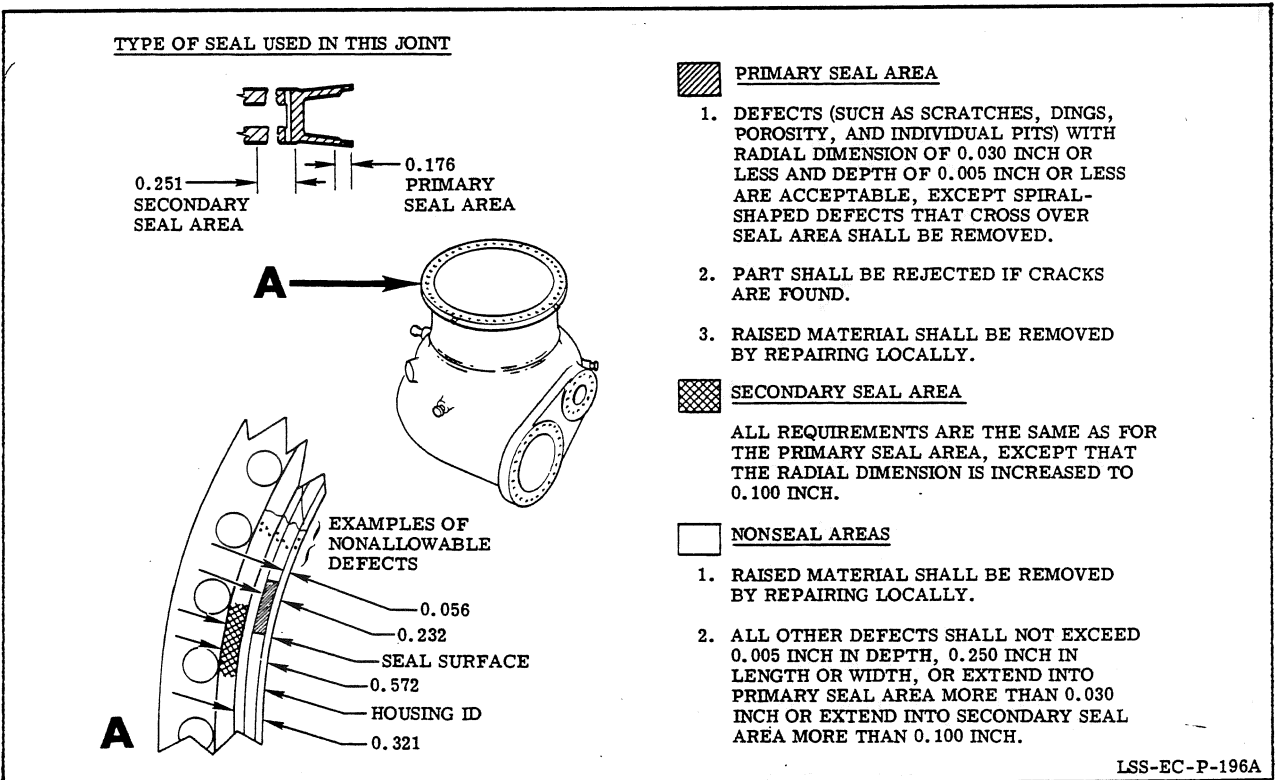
LPOTP Housing Inlet Flange Seal Surface Inspection Guide
